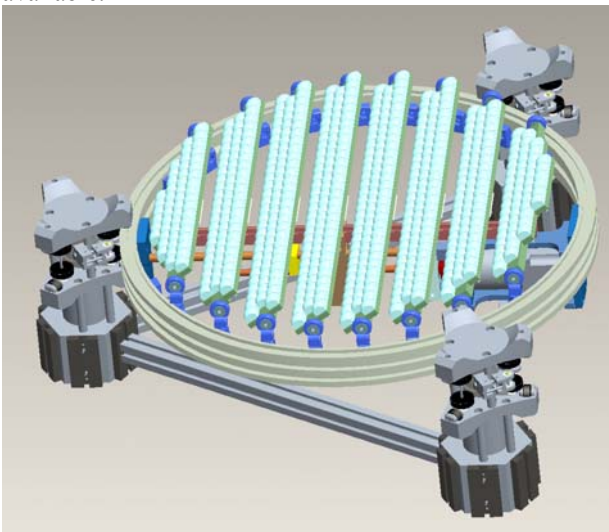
Engineering drawing of one module with about 600 "eyes" orientet to the sun; 3 pistons for bearing and drive
